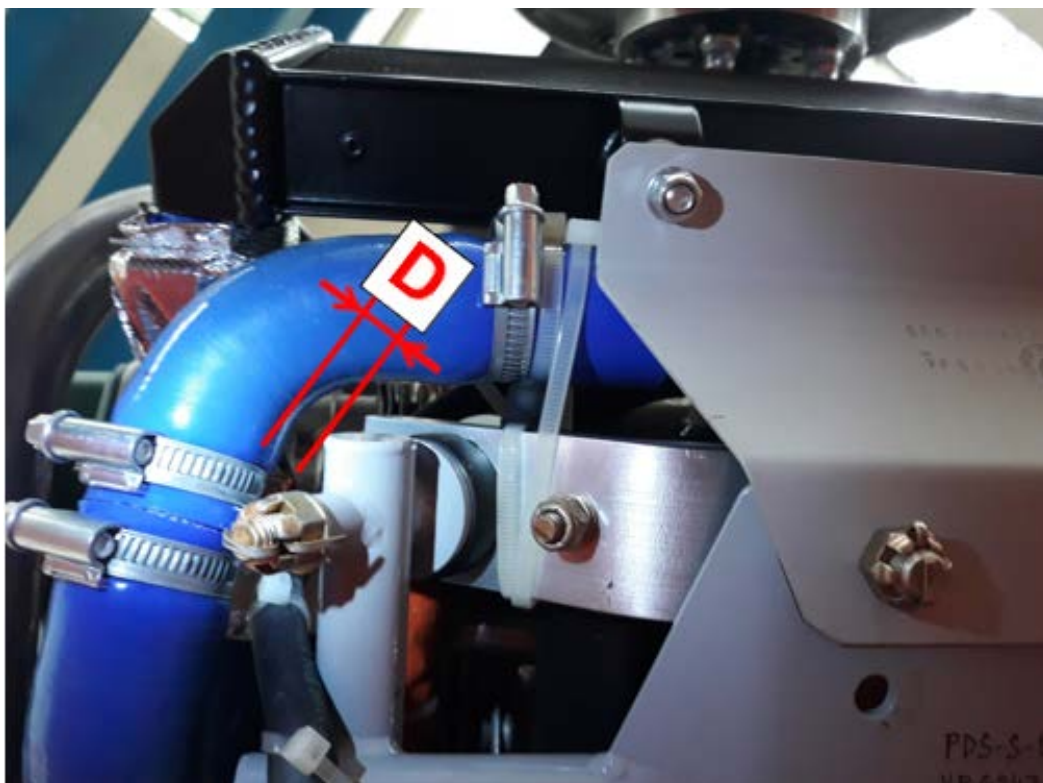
Distance between cooling tube and engine mount – right side – bottom view
